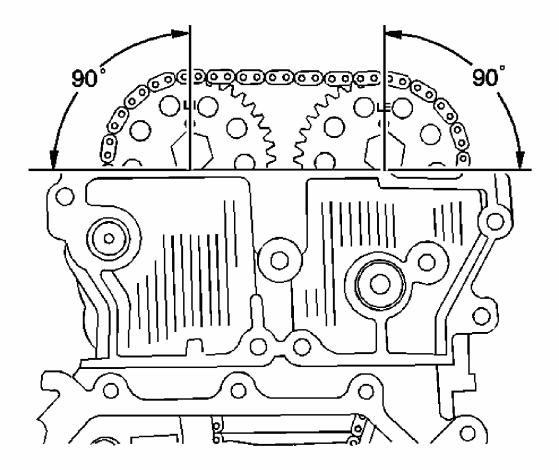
Ensuring Camshaft Sprocket Drive Pins Are At The Top Of Their Rotation
